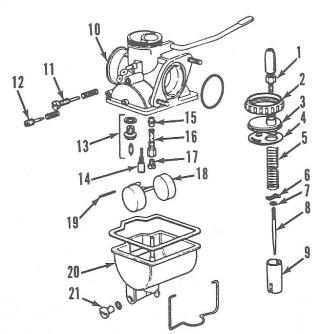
Exploded view of carburetor typical of the type used on all models.
